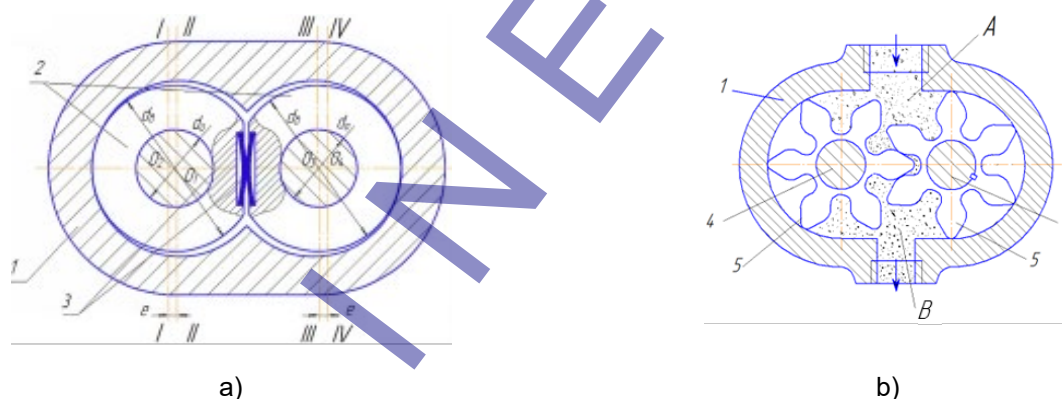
Arrangement of two support bushings in the housing bores of the gear pump and the operating process: a) arrangement of two support bushings in the housing bores of the gear pump; b) operating process
